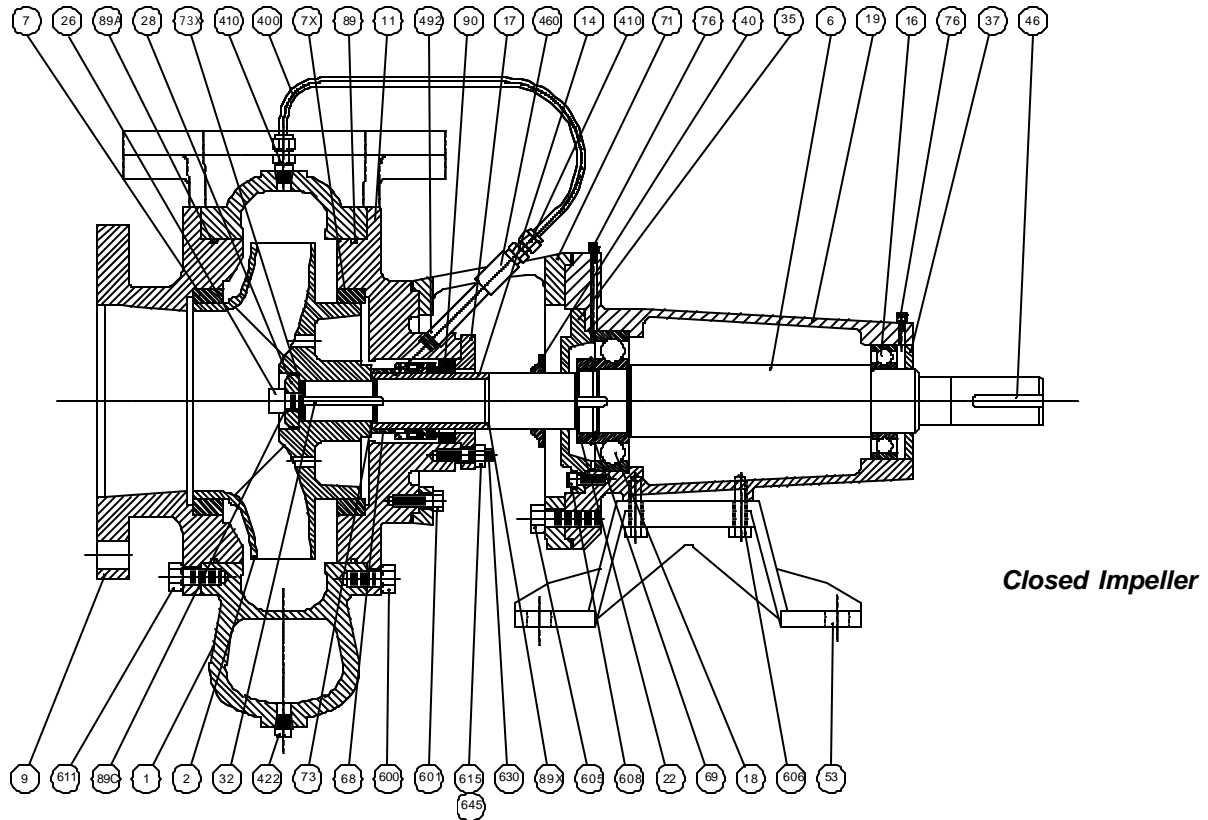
Sectional Drawings for Frame-Mounted GH Pump
